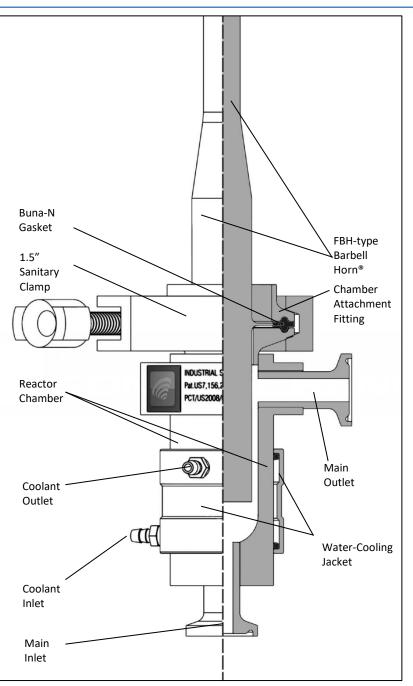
4. Cut-out view of Reactor Chamber assembled with a Full-Wave Barbell Horn[®].
